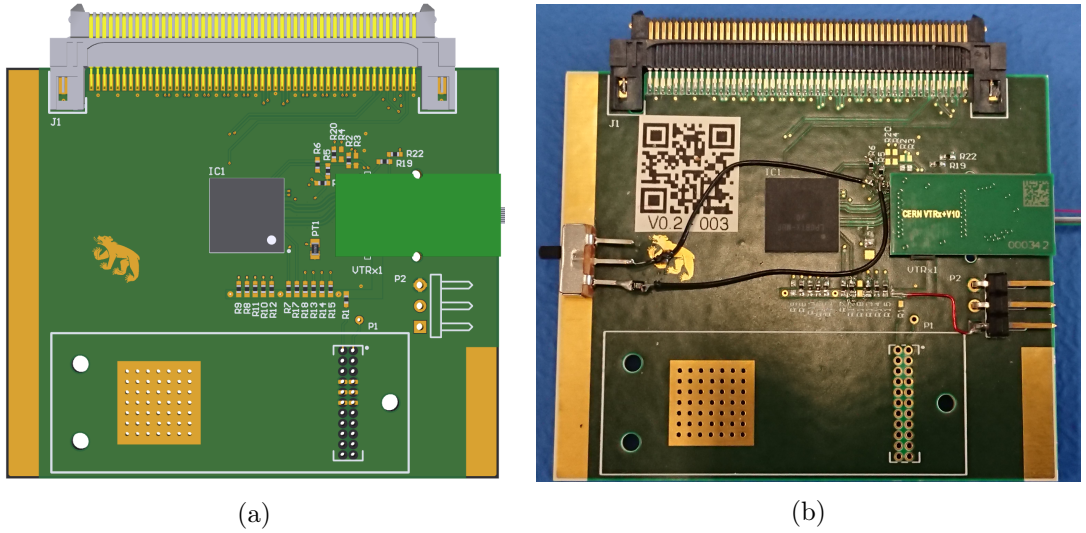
CAD view (a) and photo (b) of the Optoboard V0 prototype.
